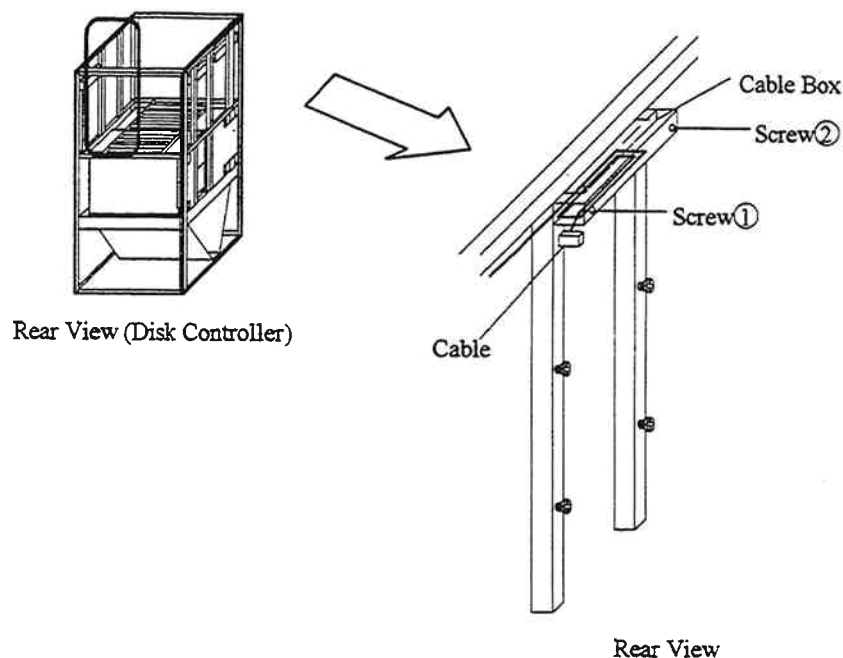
Removal of the Cable Box
